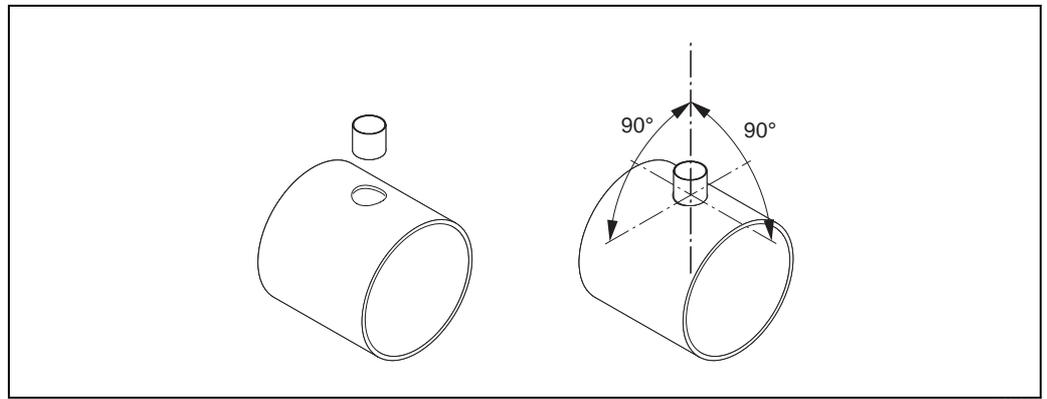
Positioning the welding socket on the pipe (or duct)
